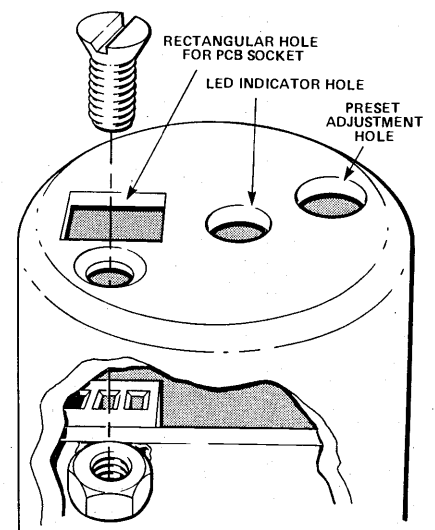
This is how we mounted the PCB in the aluminium tube. The nut is soldered to the ground track under SK1.
